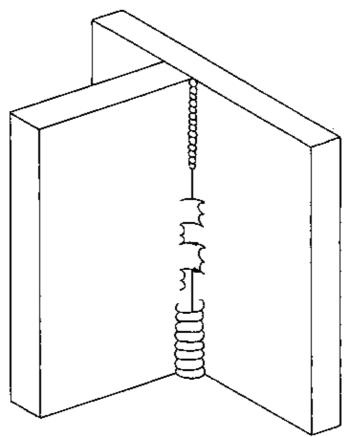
Electrode manipulation in welding the cover pass
